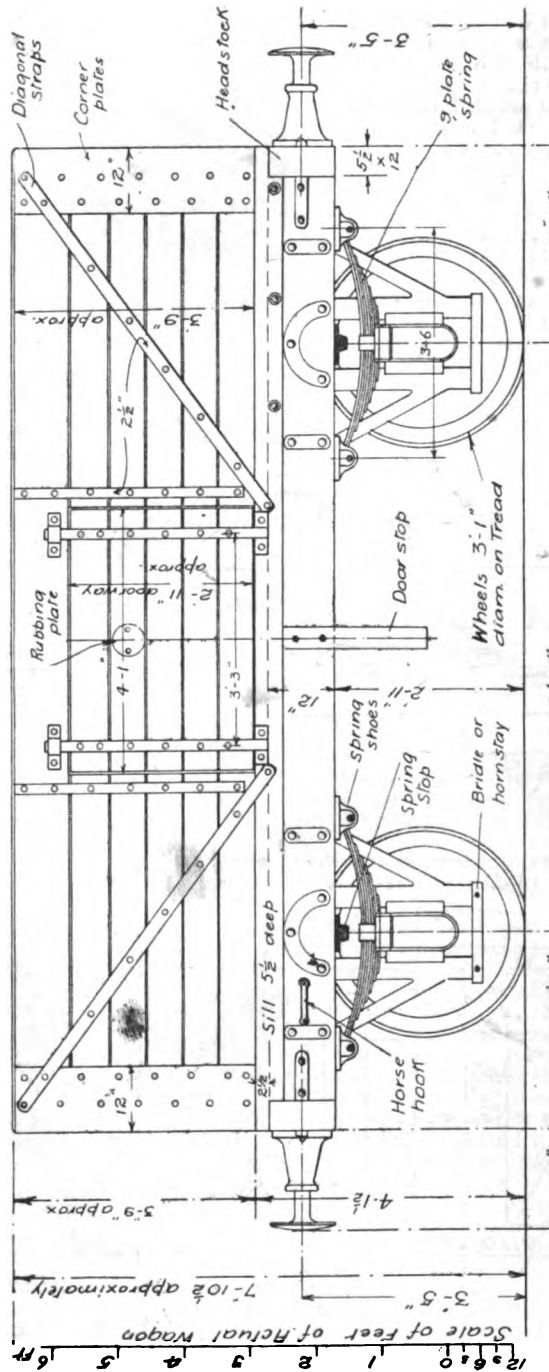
ELEVATION OF PRIVATE OWNERS' RAILWAY WAGON, WITH WOOD UNDERFRAME AND 10-TON BODY.
